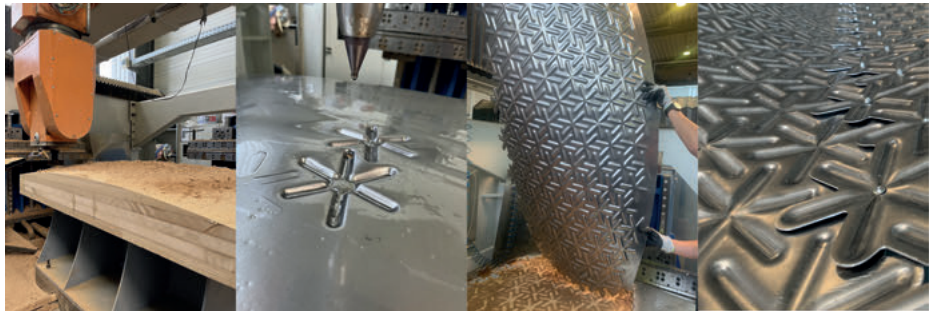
MDF tool block adapts geometry, IBU forming tool traces beads, finished component, Panel joint with pattern overlay.
